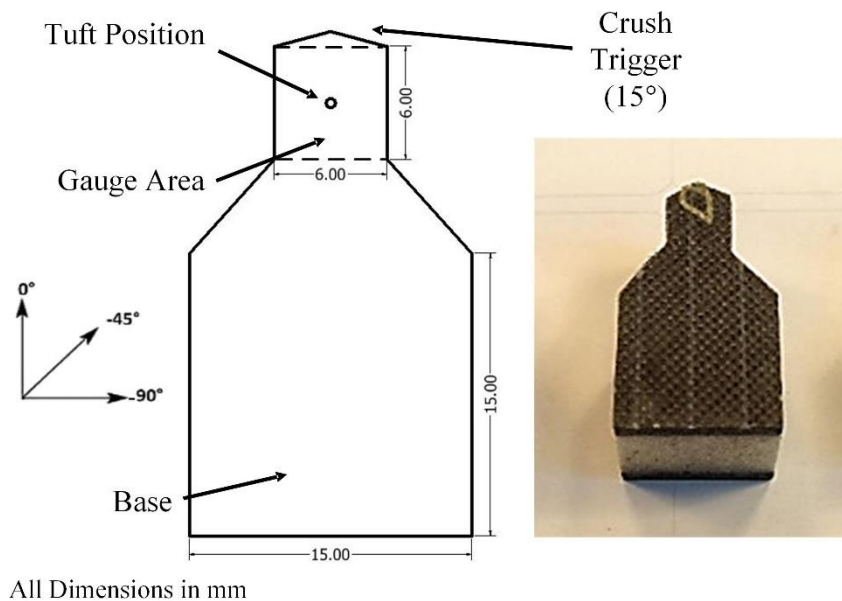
Test coupon design and dimensions (left), with a representative coupon (right).
